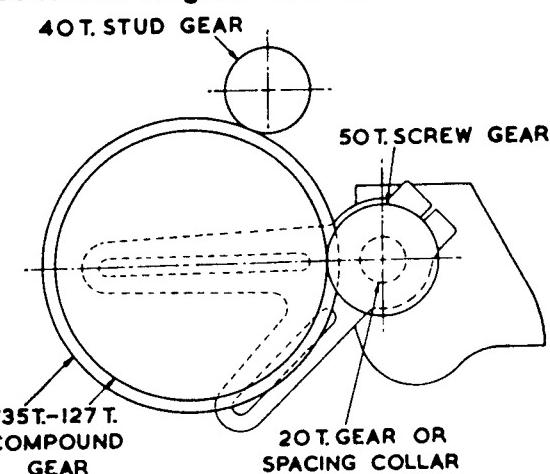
Diagram showing standard Metric Change Gear Lathe Set Up for Cutting 10 T.P.I.
